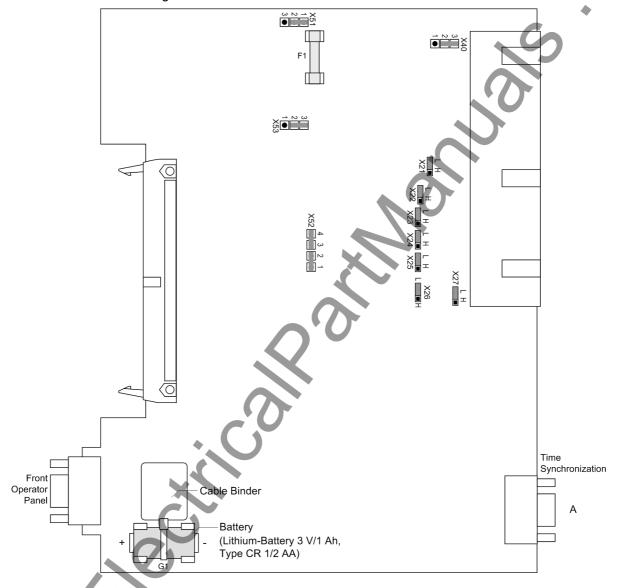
Processor printed circuit board B–CPU for devices up to release.../DD with jumpers settings required for the board configuration
